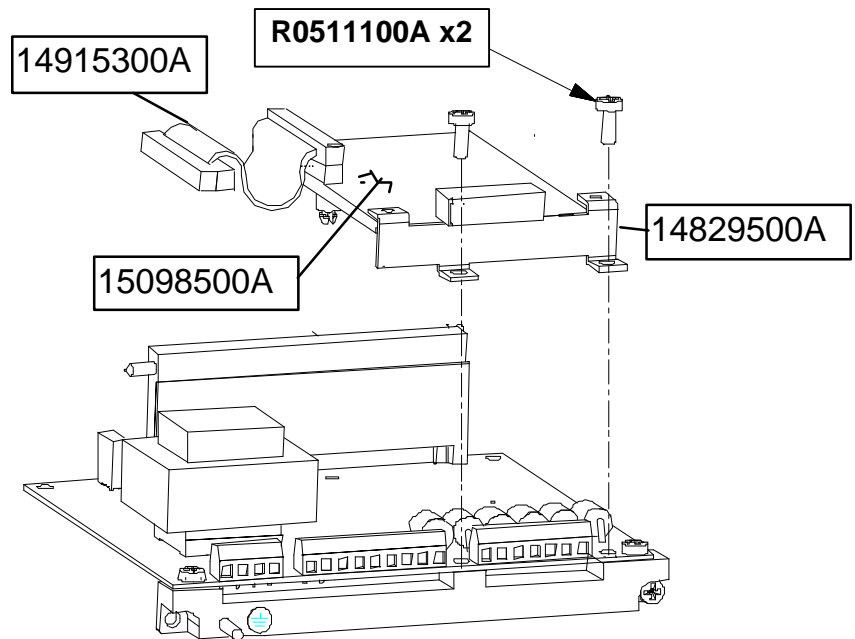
Allen-Bradley PCB Installation in Panel Mount Enclosure
